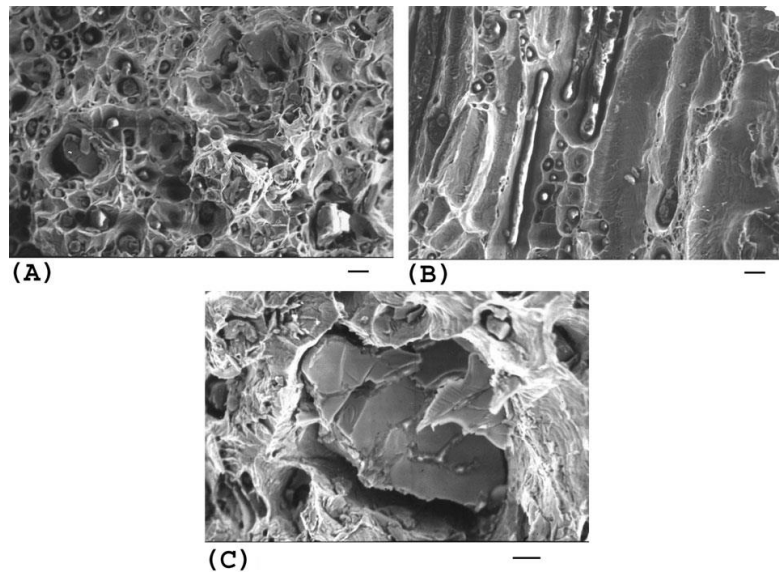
Fracture surfaces of wrought iron; bars represent 10 μm [4].
